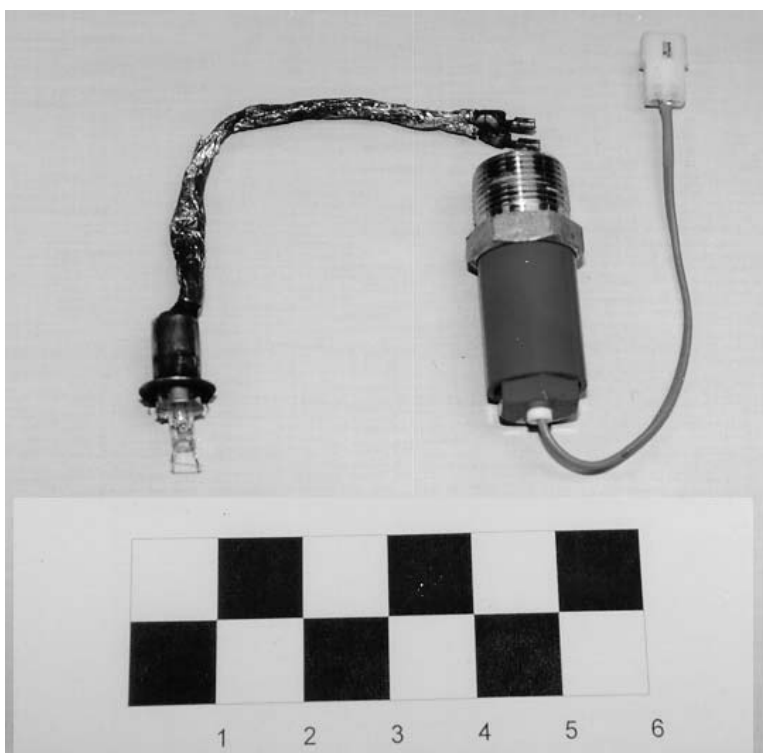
Ignitor feedthrough assembly with lamp socket.
